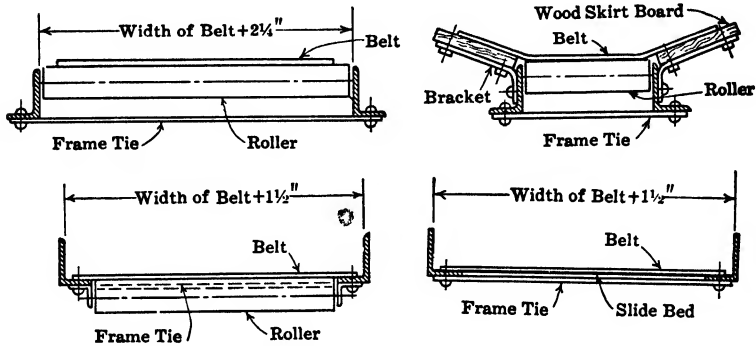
Typical Cross Sections of Package Conveyors. (Logan Company.)
